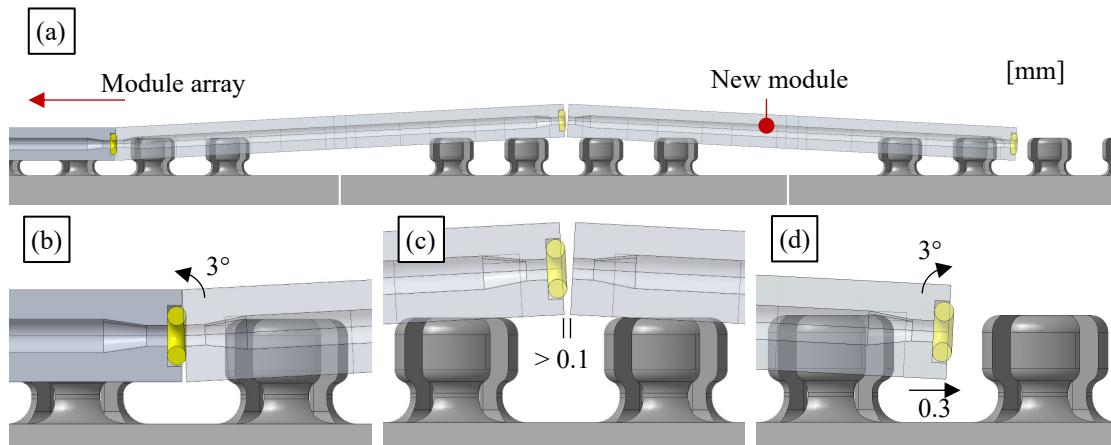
Module assembly. (a) Cross-section view of the three adjacent modules and (b-d) details of the interconnections (left, center and right ones) during the assembly.
